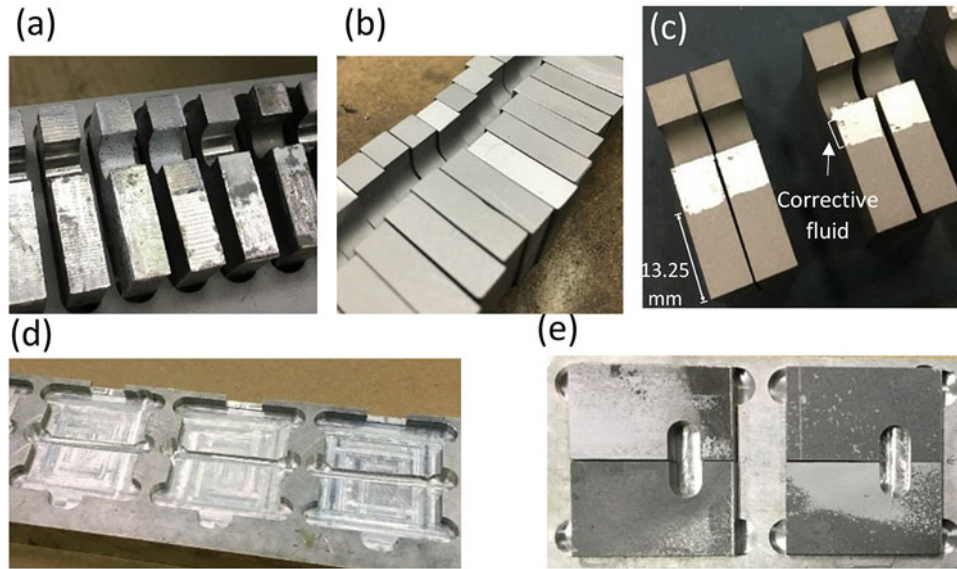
(a) Adherends before surface treatment; (b) specimens surface after grit-blasting; (c) masked bonding surface; (d) specimen fixture; (e) test samples placed in fixture
